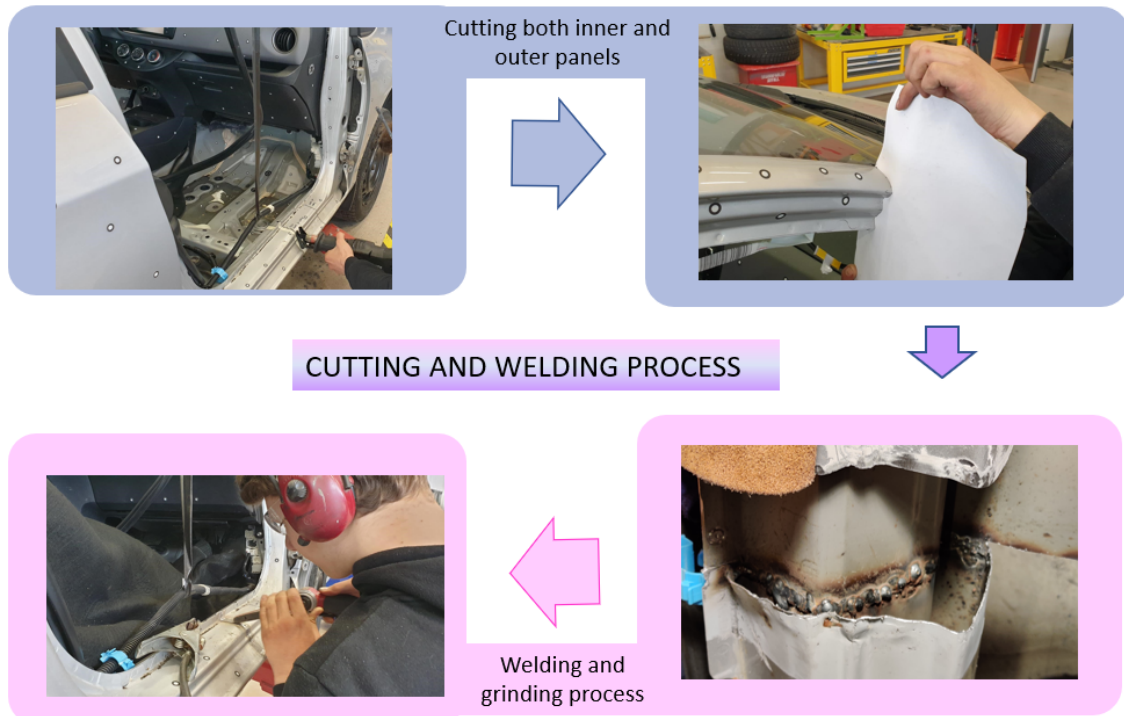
Cutting and welding process followed for preparing the test vehicle
